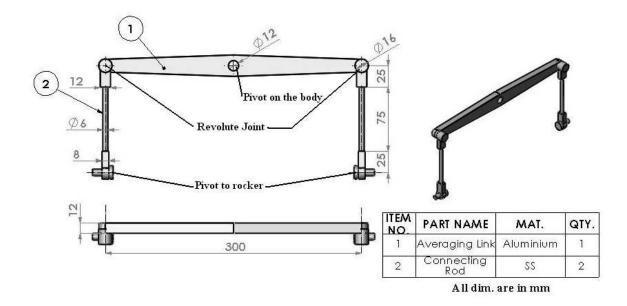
Detail dimensional view of averaging link and connecting rods assembly.
